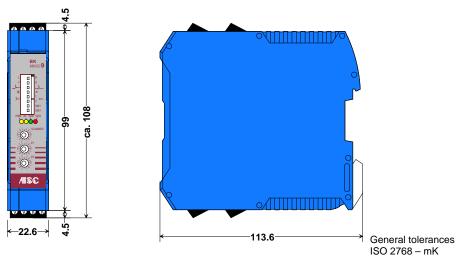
Mechanical Dimensions – I/O Expansion Module
